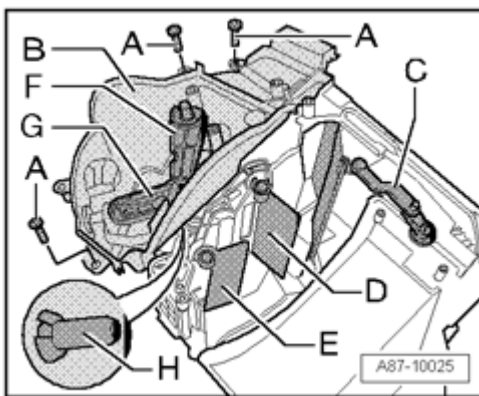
Identifying Bolts, Cover, Recirculated Air Flap, And Fresh-Air/Air Flow Flaps
